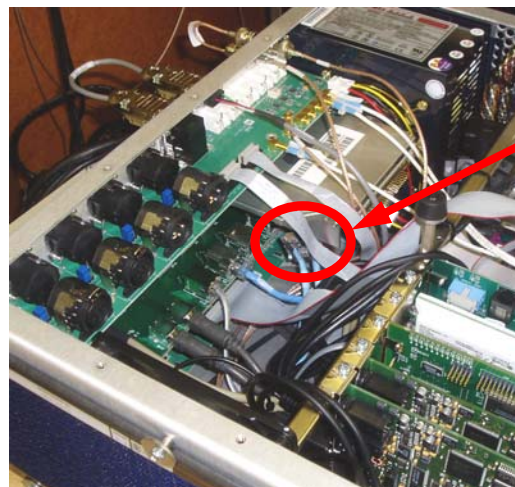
Connect 44.1 kHz Cable to J16 on SRC PCB Assembly
